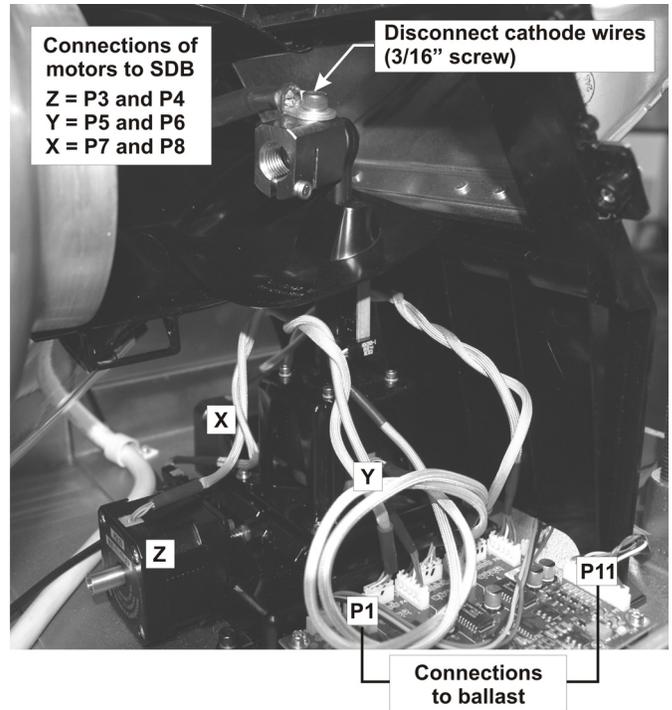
REMOVE LAMP ADJUSTER ASSEMBLY
